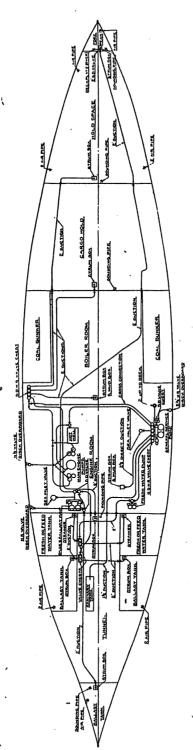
Typical Pumping Arrangements of a Cargo Steamer.
